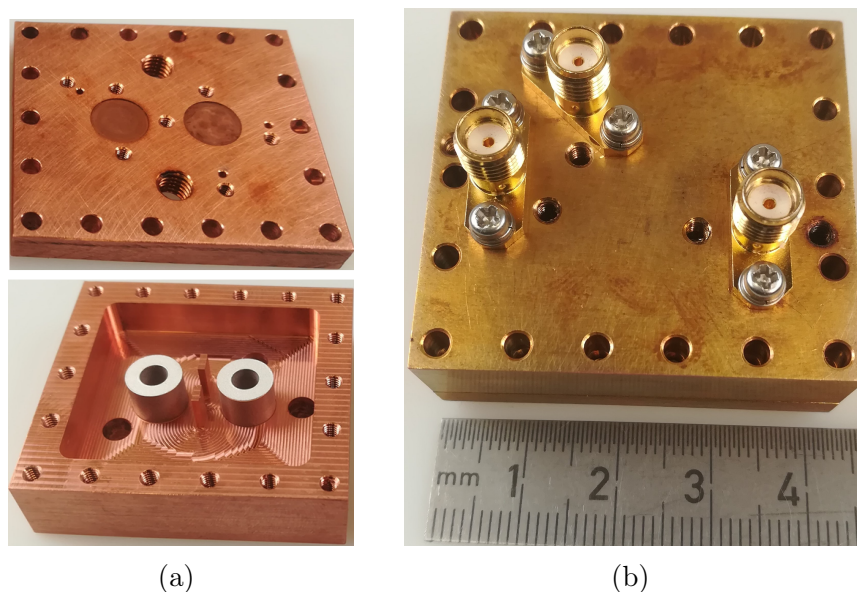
Diplexer prototype. (a) Disassembled parts. (b) Assembled.
